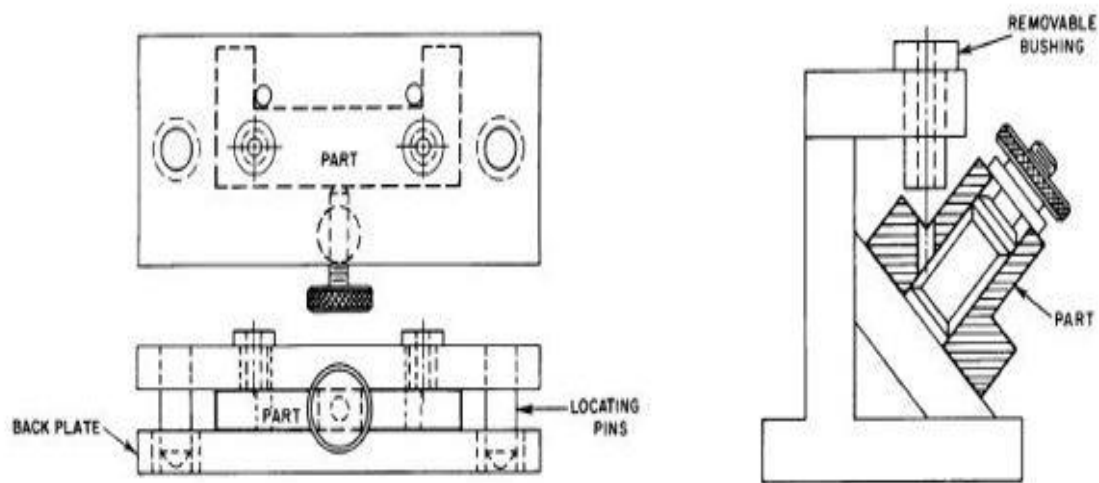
Sandwich jig (left) and Angle jig (Right) [21].
